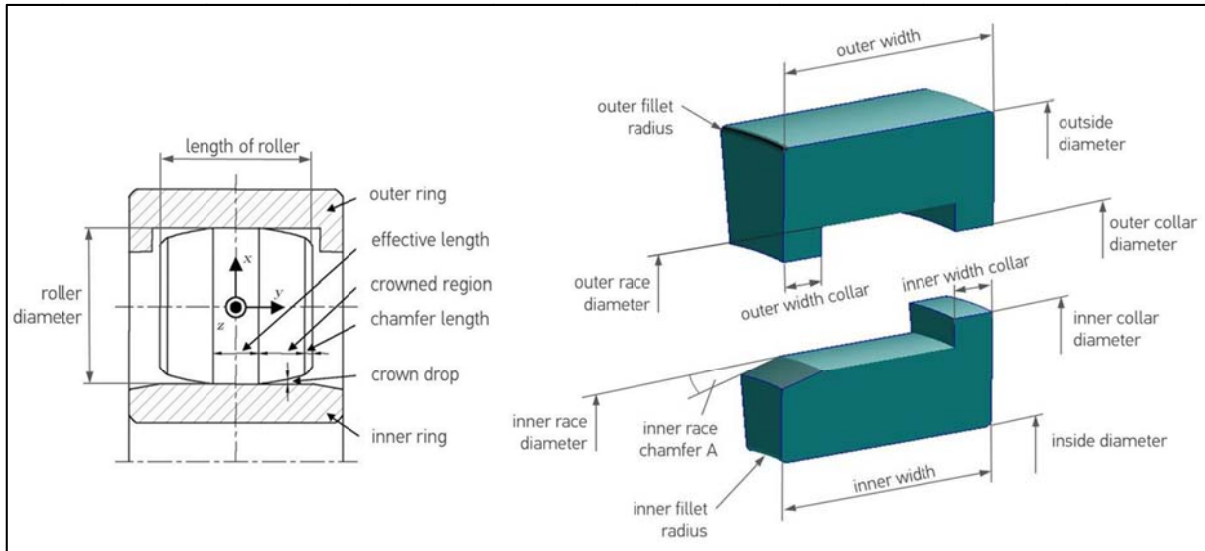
Illustration of Bearing AT input parameters for cylindrical roller bearings
